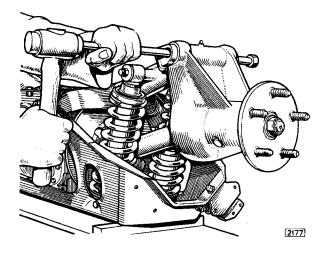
Drifting out the wishbone outer fulcrum shaft.
